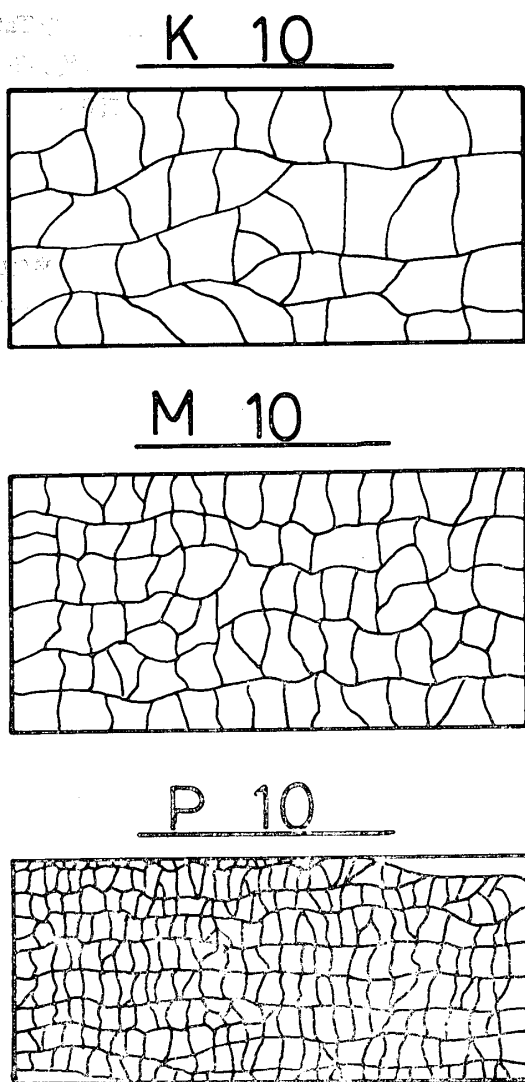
Sketch of grinding cracks in same grade number of sintered carbides.
